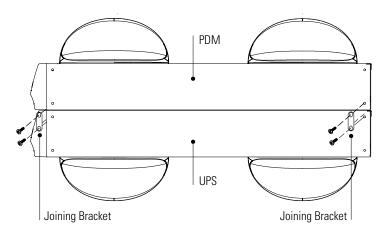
Installing the Joining Brackets (Top View with Pedestals)
